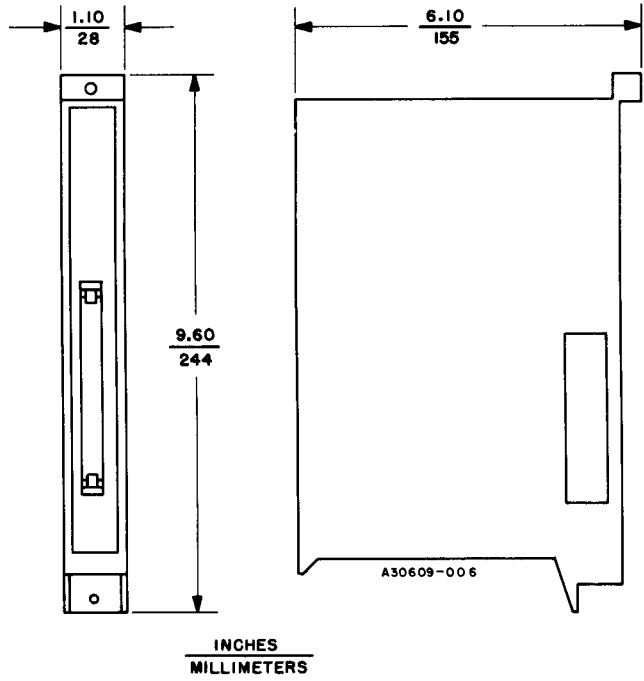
Type CRM-115,116 Bus Expander Modules,
